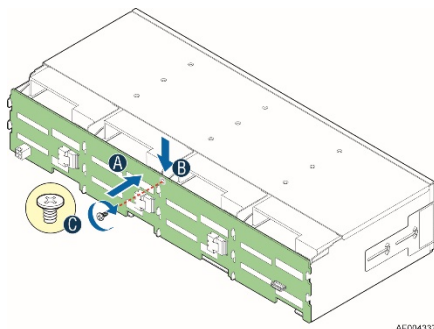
3.5" Hot-Swap Backplane and Drive Bay Assembly
